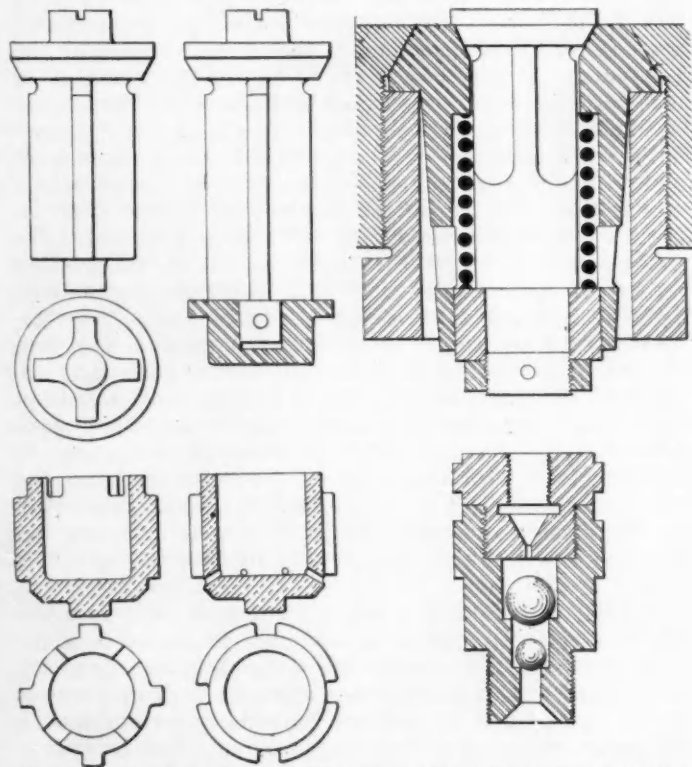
TYPES OF POPPET, CYLINDRICAL AND BALL CHECK-VALVES USED IN INTERNAL-COMBUSTION ENGINES
